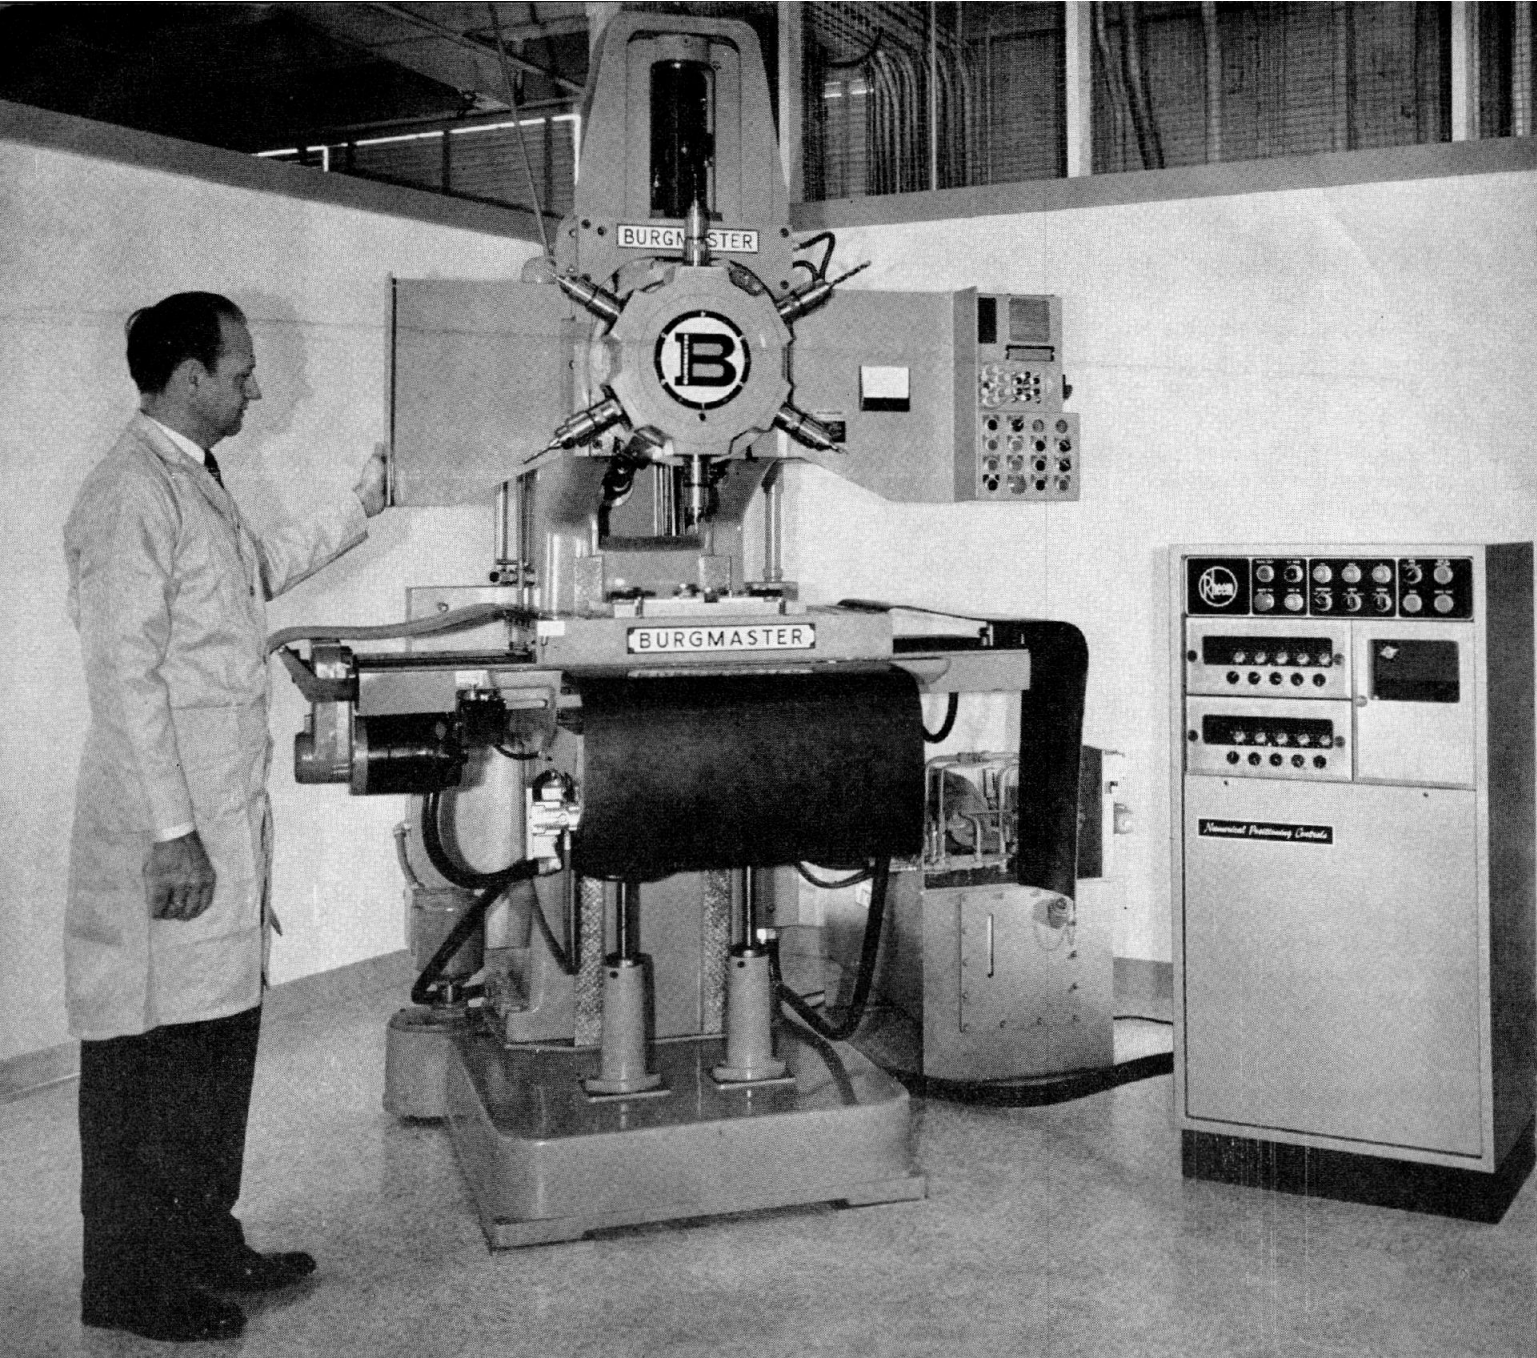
MACHINE-TOOL numerical positioning control system with punched-tape reader.
